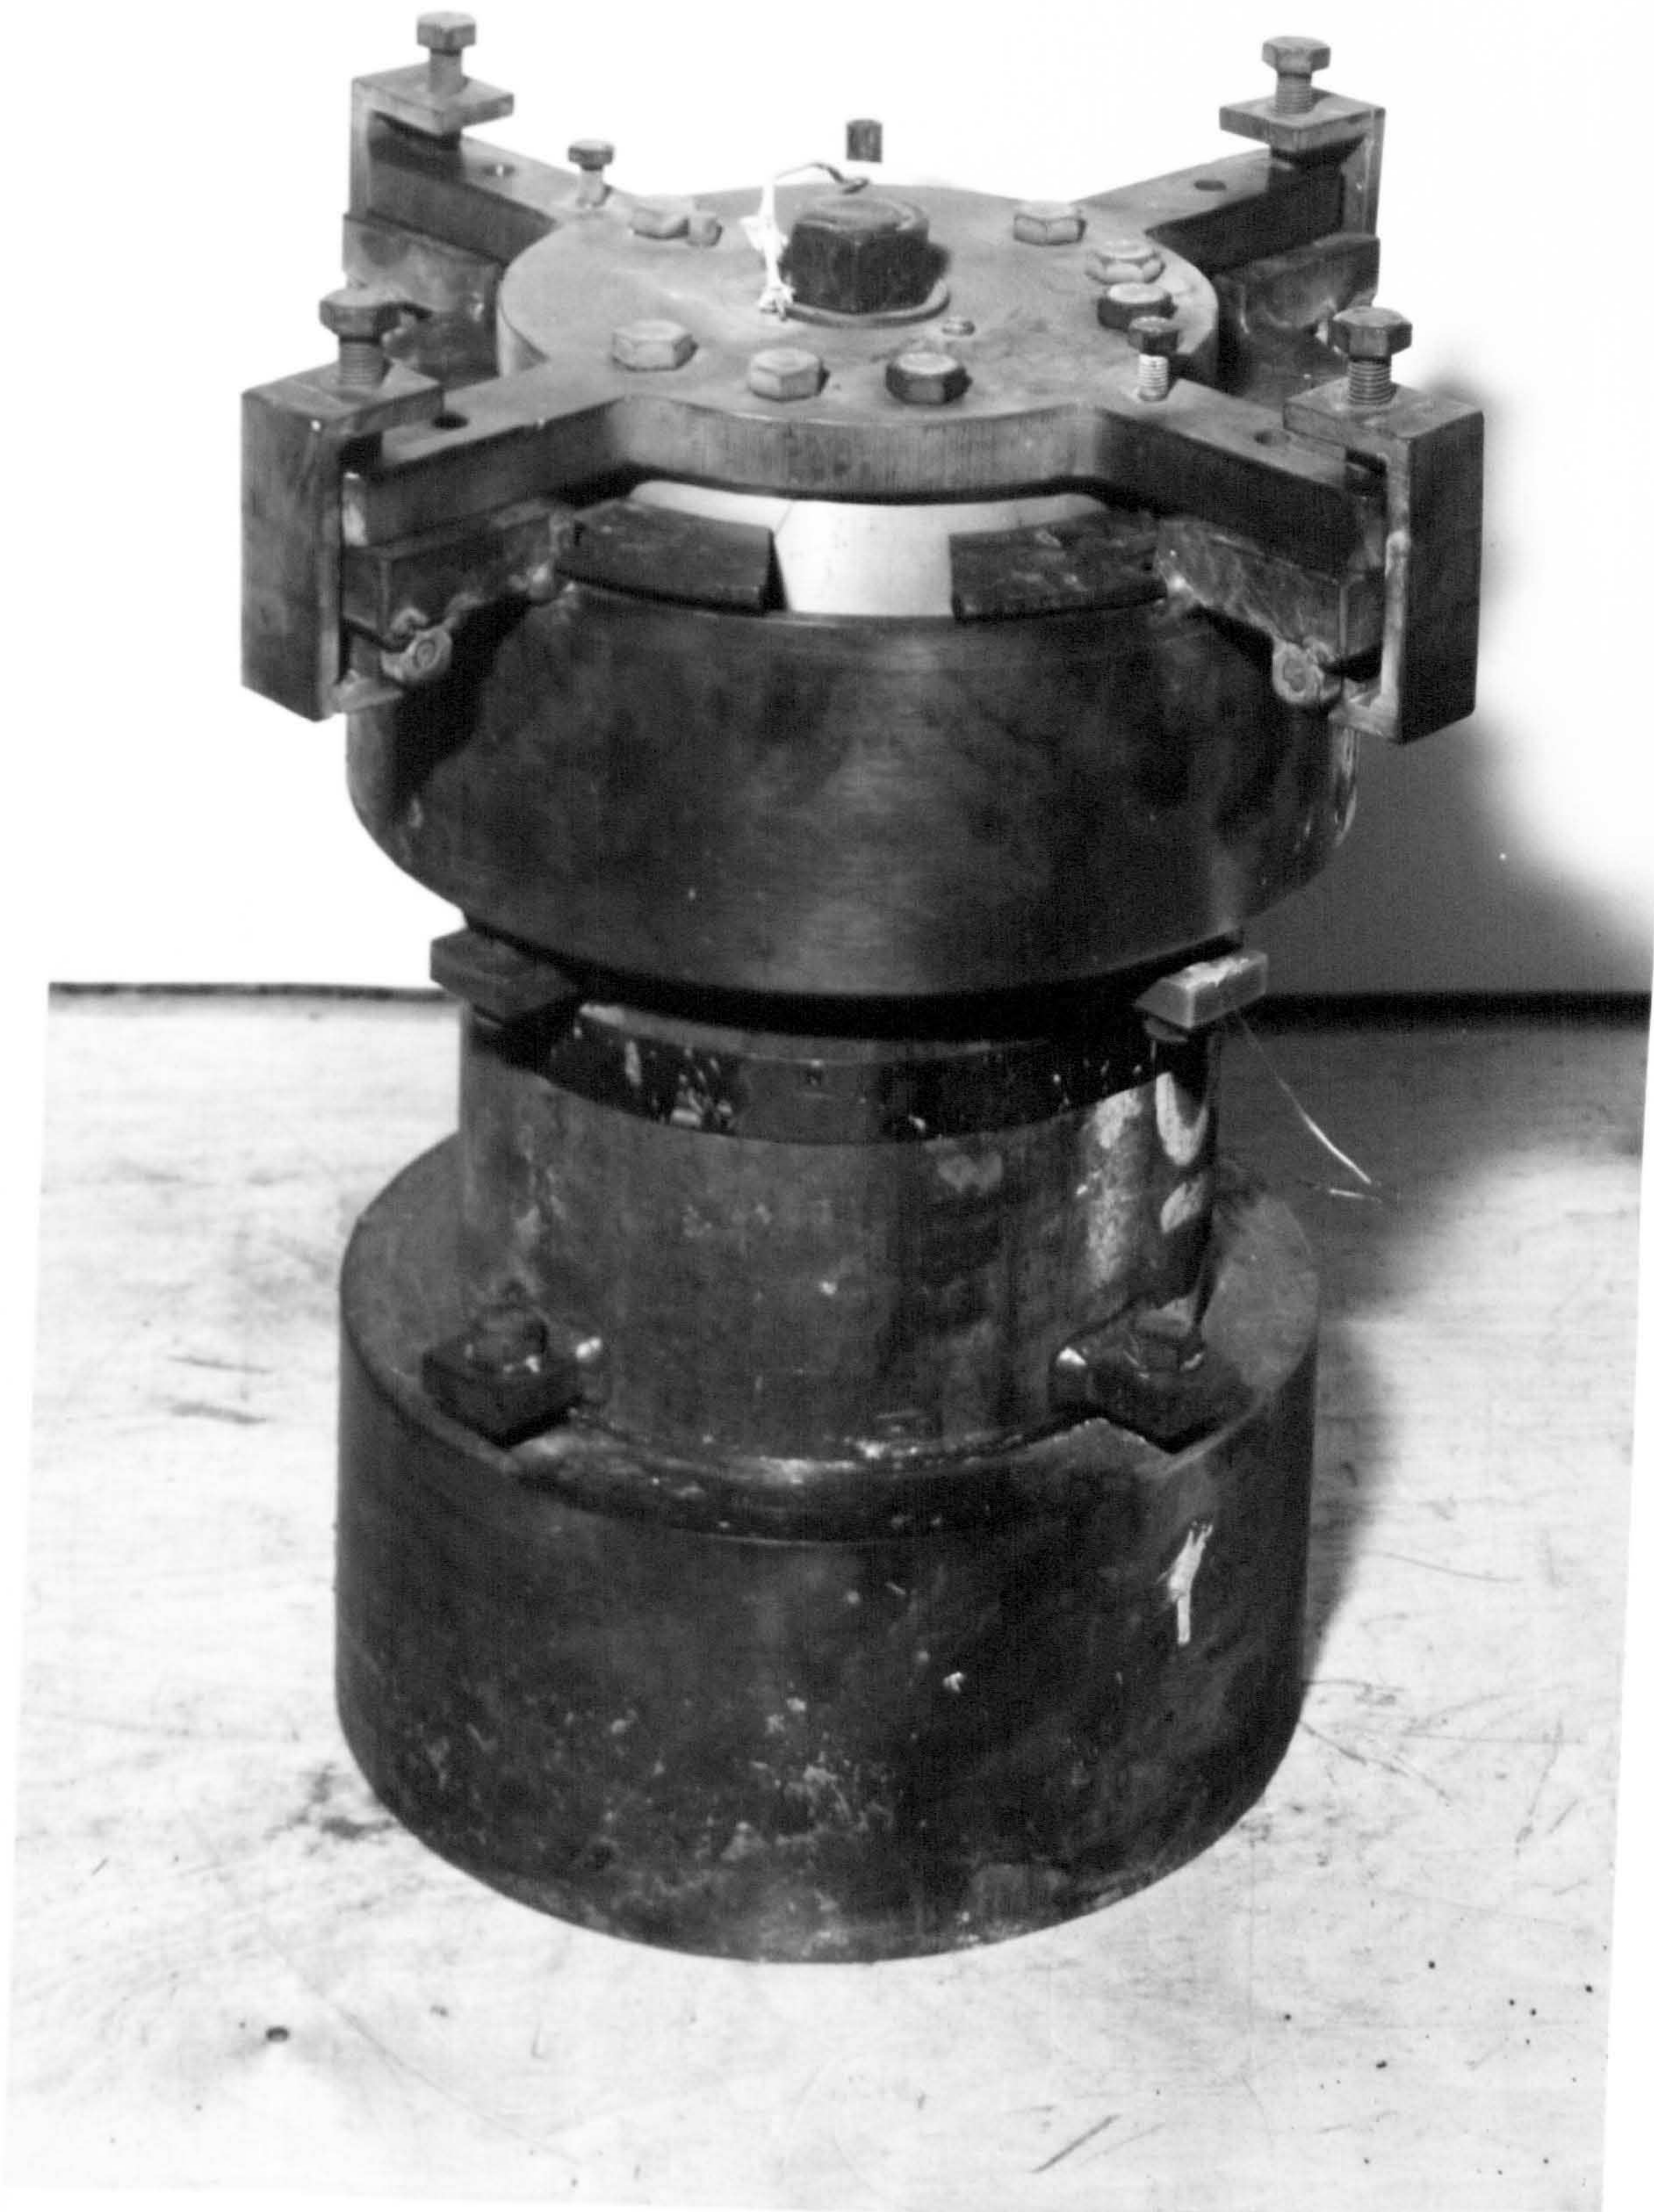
(b) THE PRESSURE VESSEL MOULD
